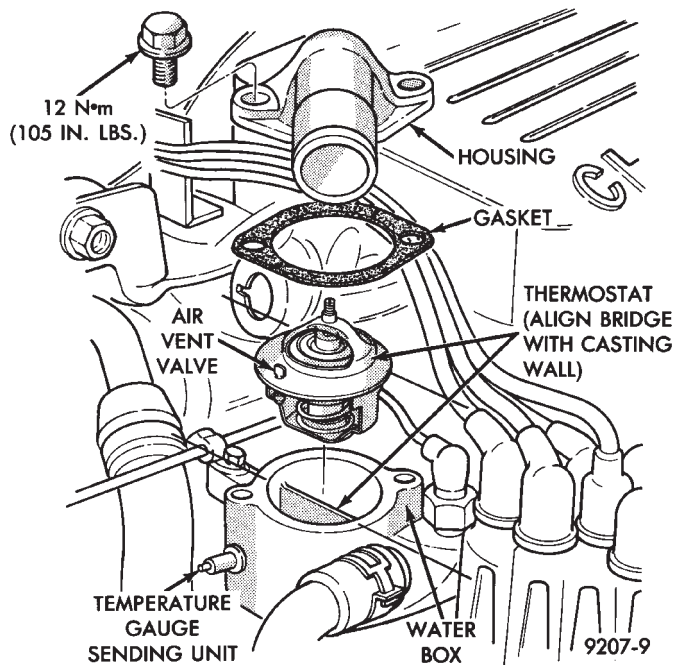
Thermostat, Housing, and Water Box—3.0L Engine
